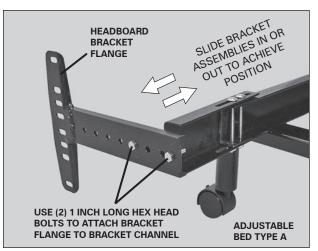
Bed base Type A headboard bracket flange attachment.
